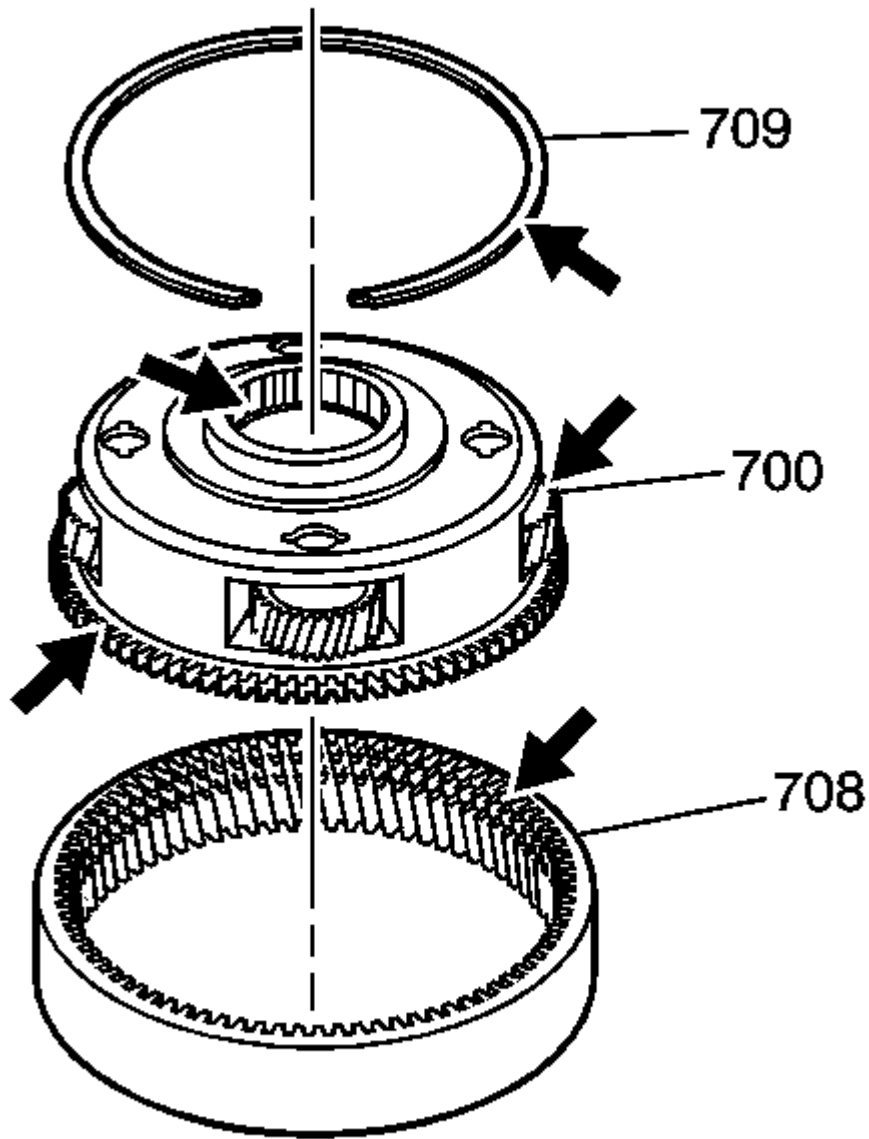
Identifying Inspection Of Input Carrier Pinions, Reaction Internal Gear & Snap Ring For Damage
